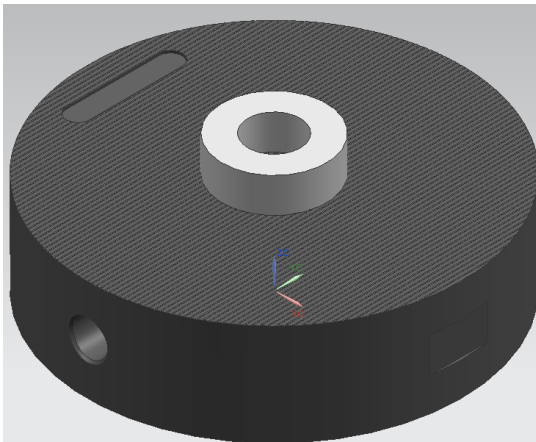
Three dimensional model of ring test specimen on platen surface prior to compression.
